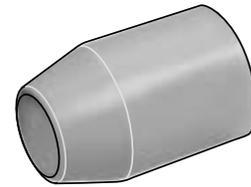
Crankshaft Guide (Part No. HD-42326A)
